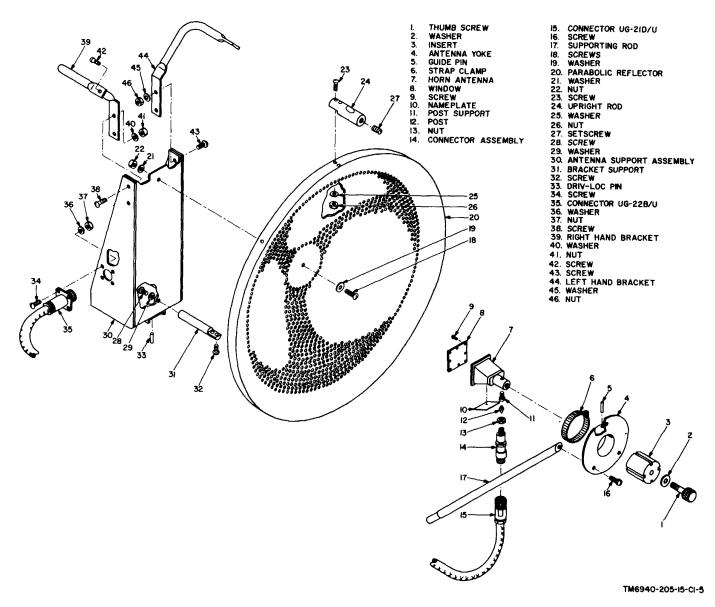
Antenna AS-1057/ULT-T2, exploded view.
